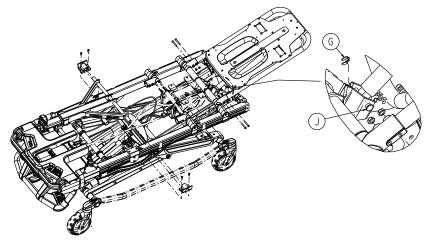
Remove the truarc ring and Fowler cylinder pin
